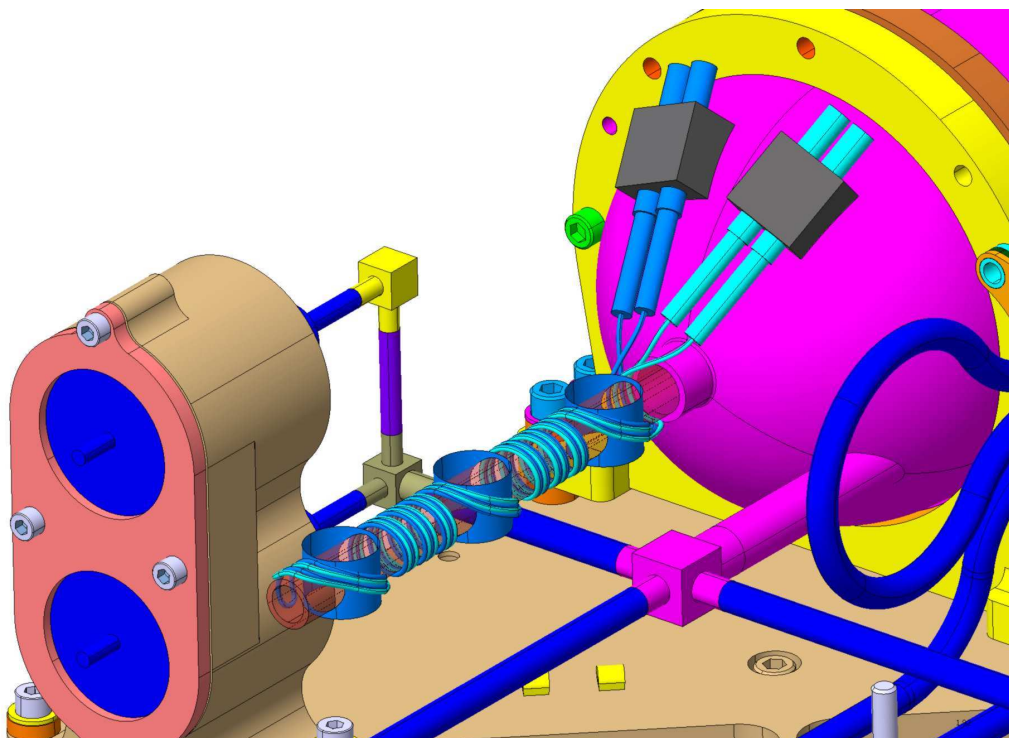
Assembly drawing TTCS Box with TTCS accumulator
